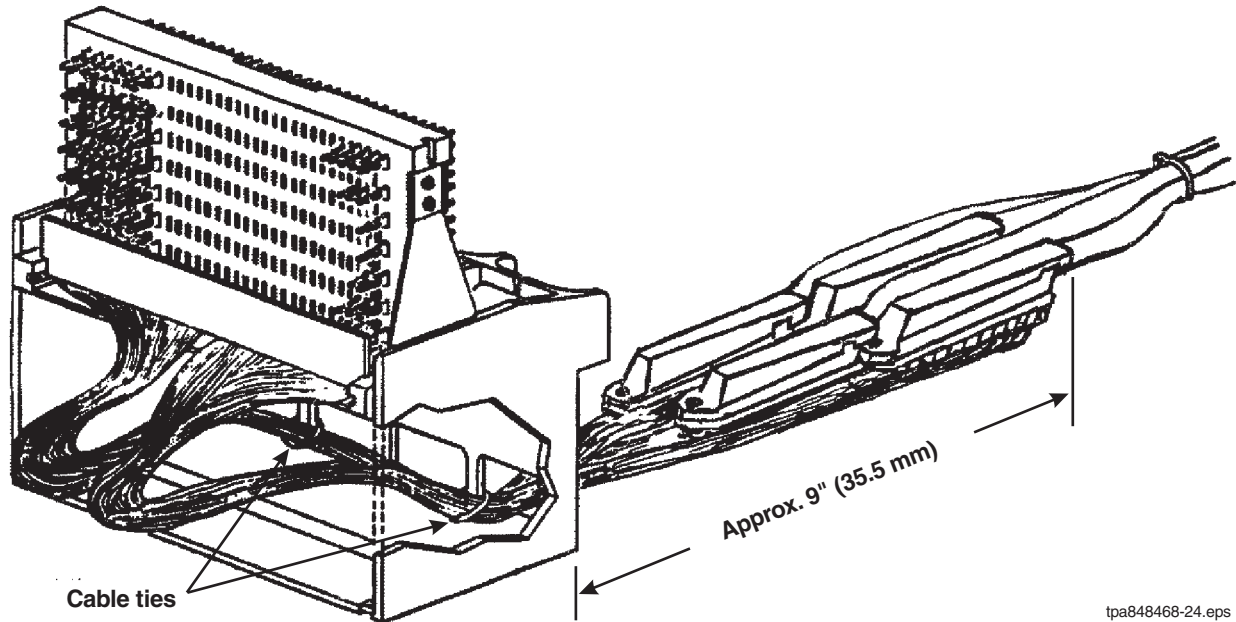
Block Rotated to Open Wiring Position with TRW-Type Connectors
